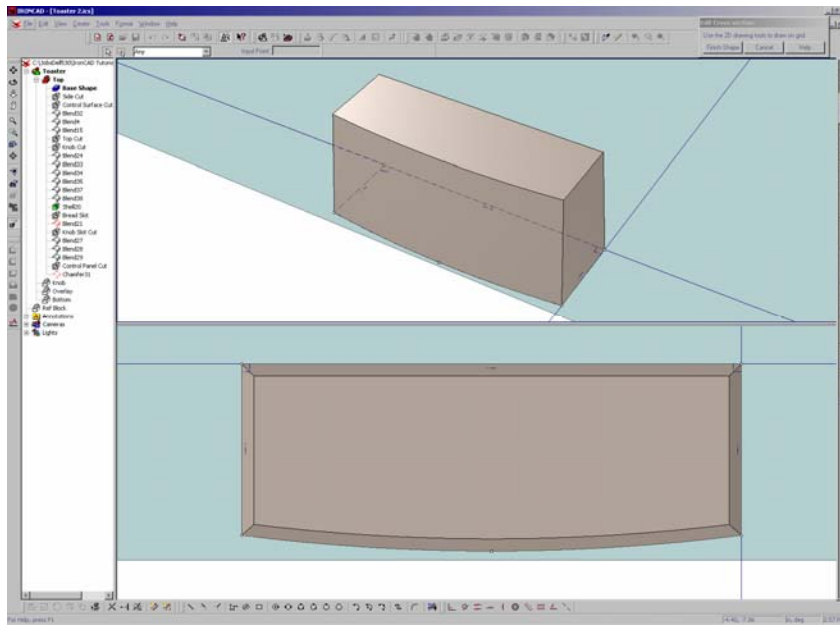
Base Shape Section with Draft shown in Perspective and Top Views. Note how the top of the Base Shape is smaller than the bottom of the Base Shape.
